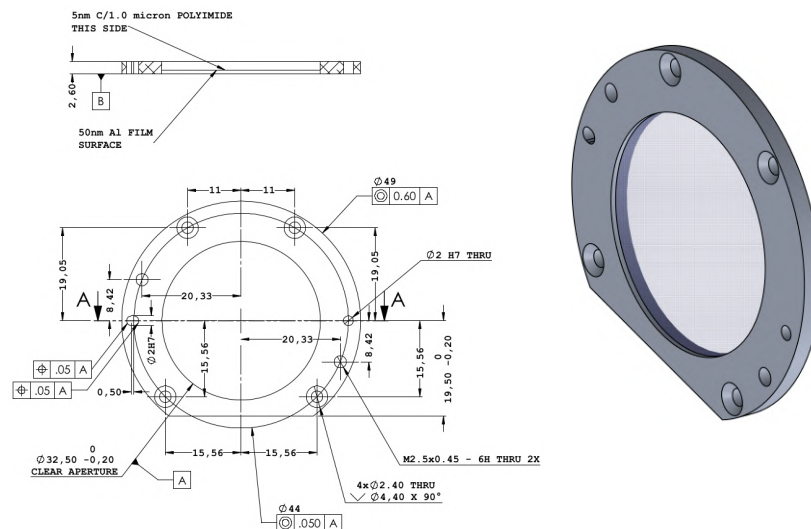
Drawing of the IXPE DU-FM ions-UV Filter. (All dimensions are in millimeters.)
